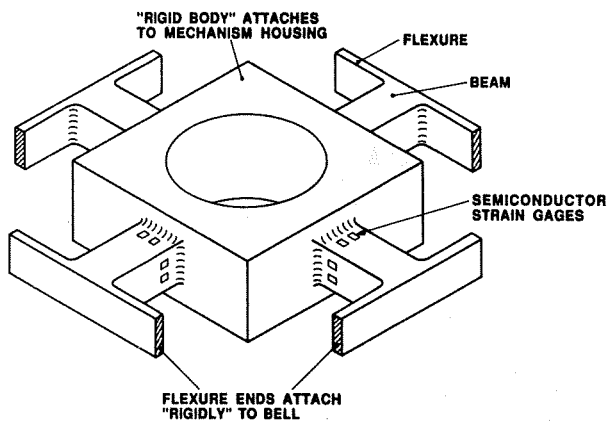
Force-Torque Sensor Frame, Gages and Loading Schematics
